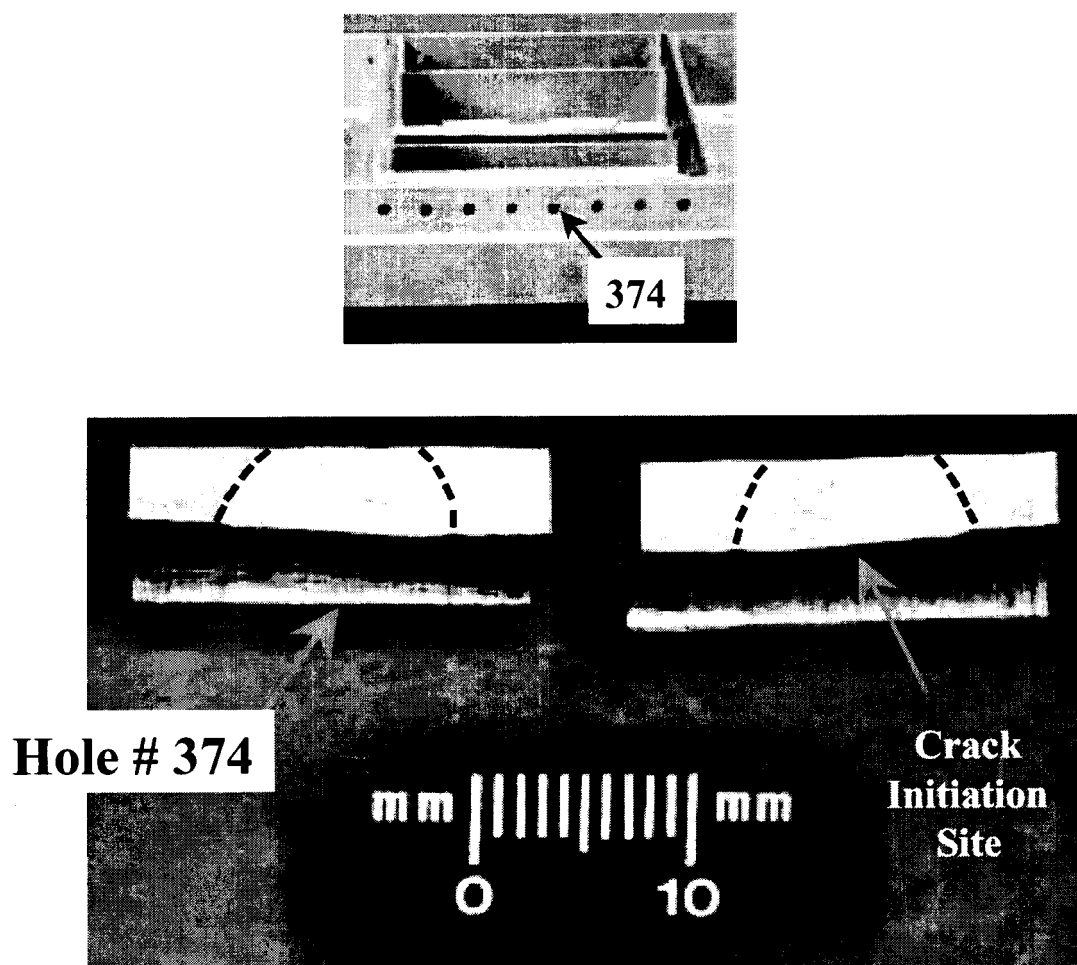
The photograph shows both surface of the crack emanating from fastener hole #374. The location of fastener hole #374 is shown in the small photograph.
